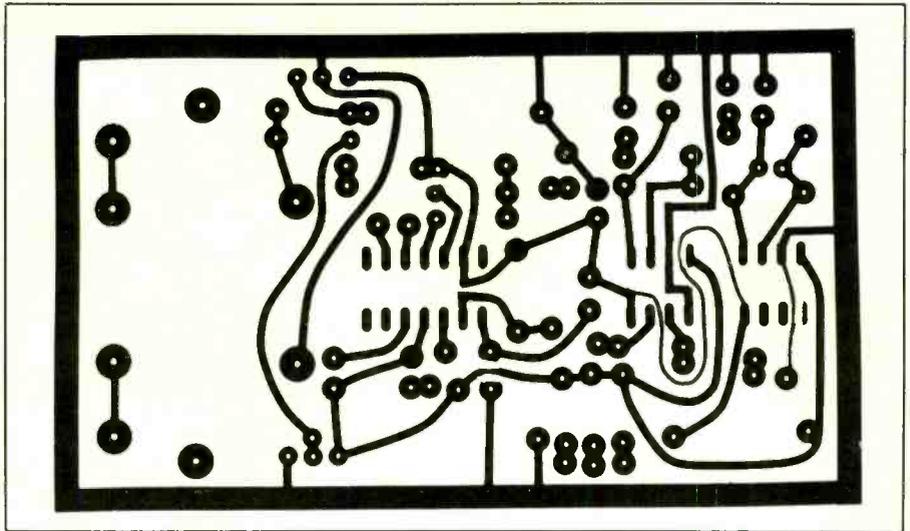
Actual-size etching-and-drilling guide of function generator's printed-circuit board.
